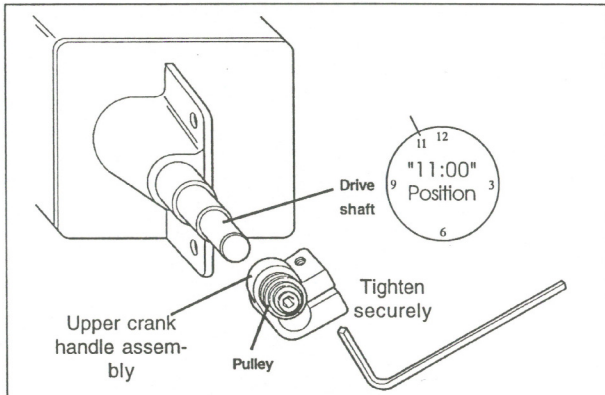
Attach Upper crank handle assembly in "11:00" position.
